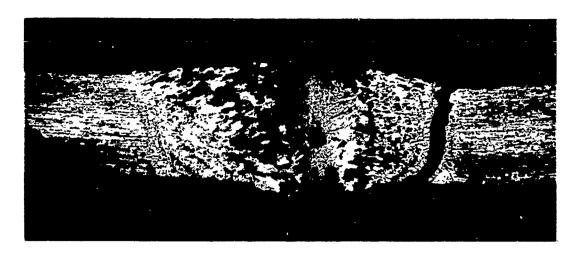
DCRP-GMA welds in 1/8-in. sheet made with conditions that produced pronounced nipple-shaped weld beads.
